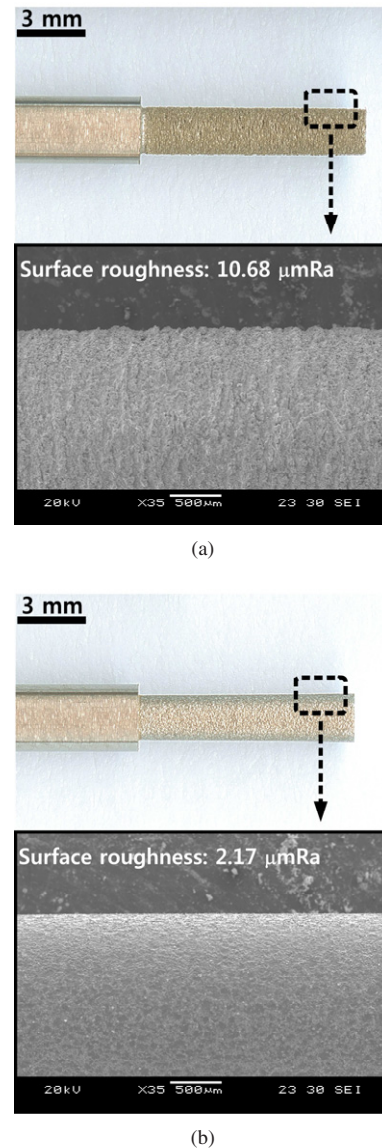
(a) The shaft machined by a wire-EDM turning; (b) The shaft machined by a strip-EDM turning.
